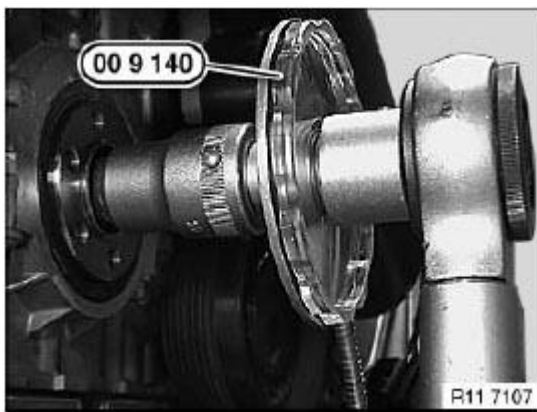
Securing Central Bolt With Special Tool (00 9 140)
